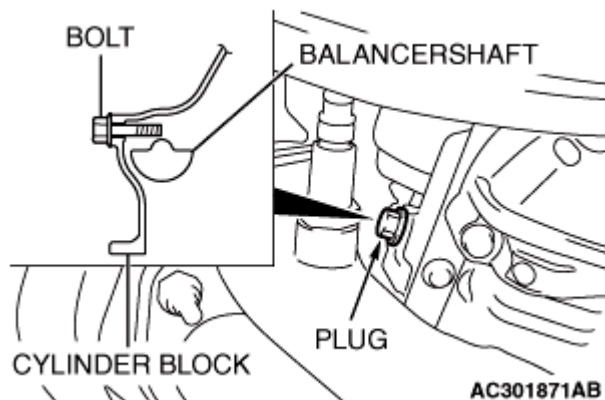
Identifying Cylinder Block Plug, Cylinder Block And Balancer Shaft
